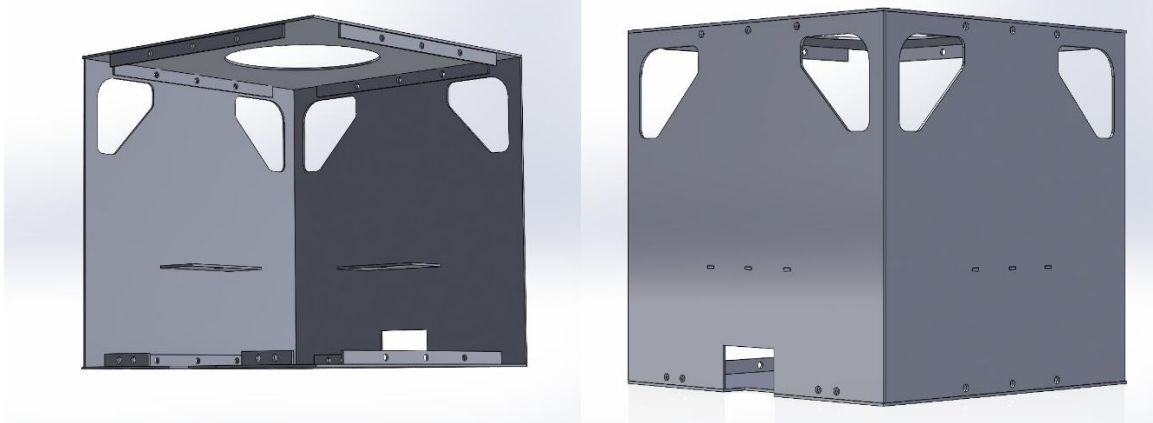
Plate assembly of the frame using the tab-and-slot feature to install the mounting strips that will hold the plates together, also showing the mounting shelf.
